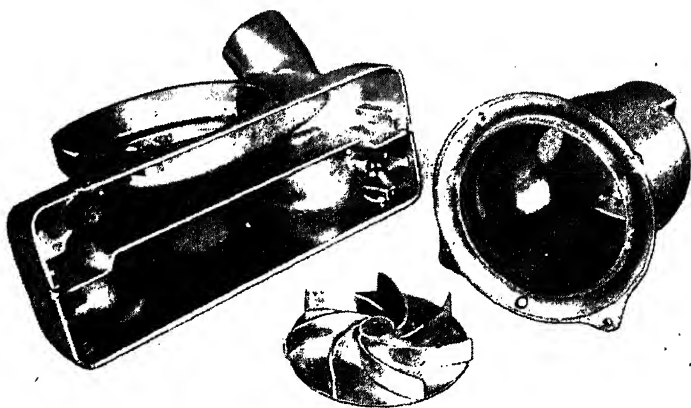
Vacuum cleaner parts pressure die-cast in aluminium alloy
